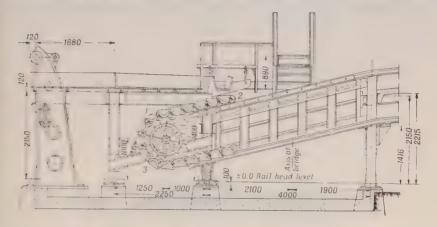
Pig-iron casting machine (view from the pouring side): 1—moulds; 2—rollers; 3—sprocket
